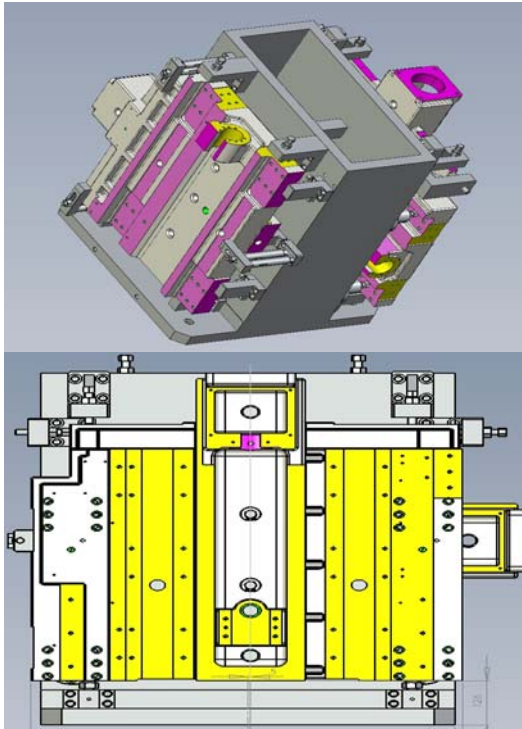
Mechanical design of Jig & fixture under optimal constraints(upper: 3D, lower: 2D draft)
